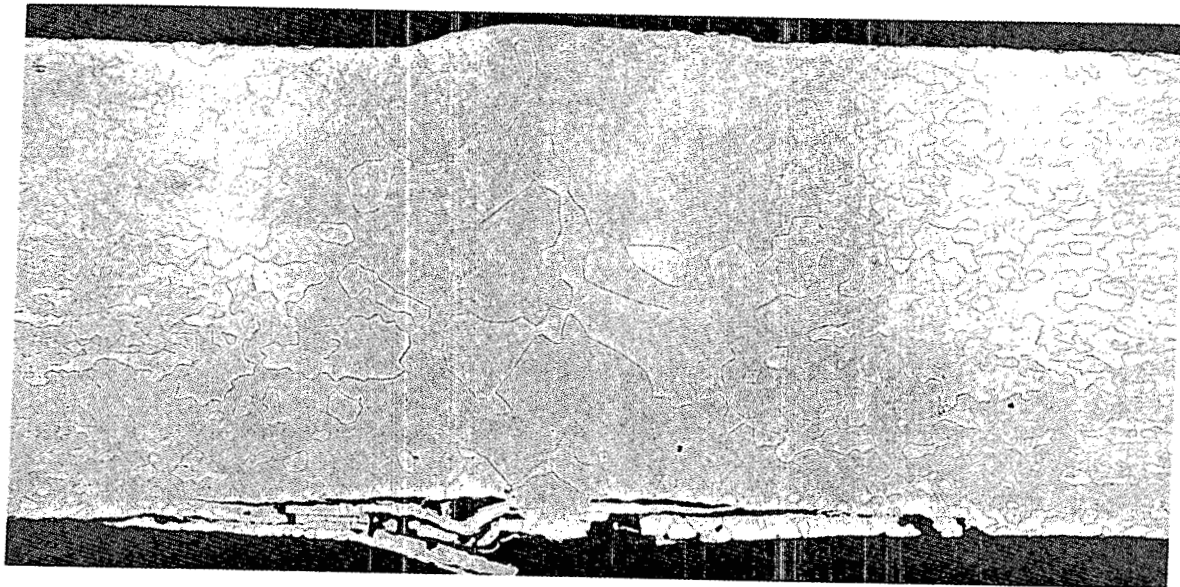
Typical section of electron beam weld in unalloyed tungsten.  $\times 80$ .
